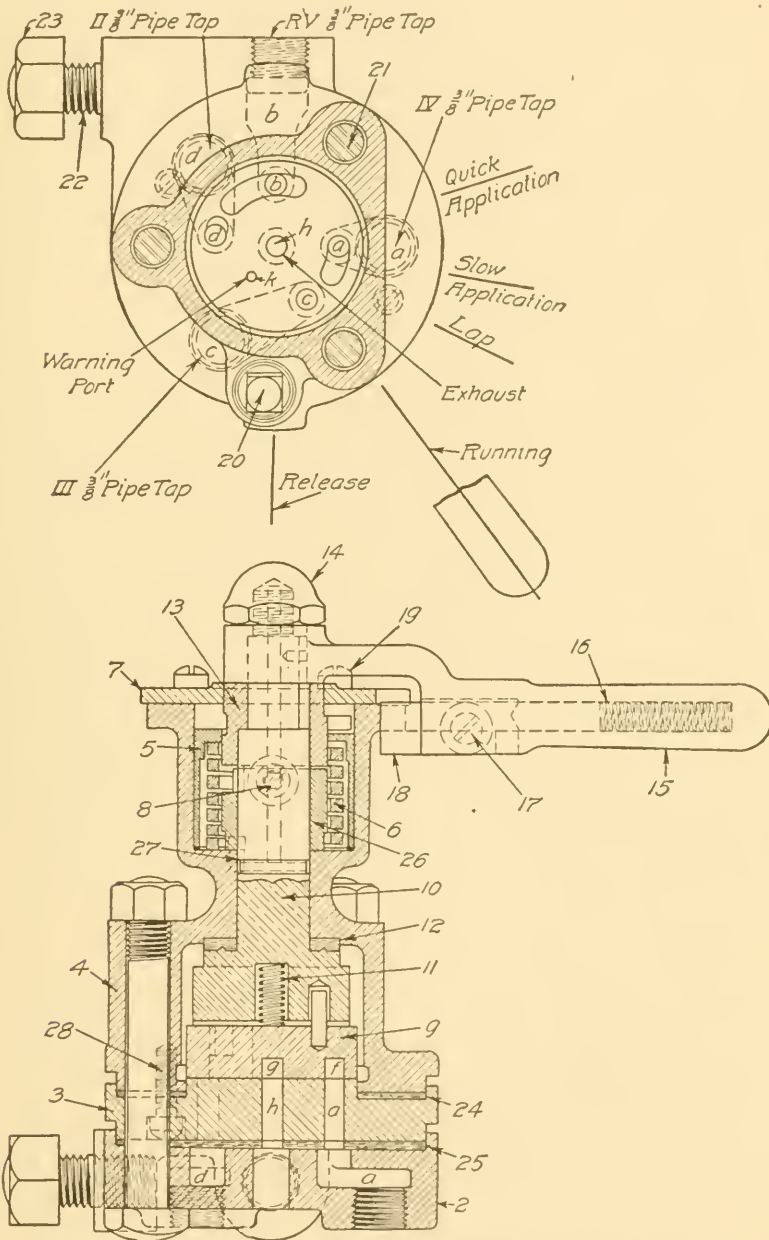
Plan and Sectional Elevation of Westinghouse "S-6" Independent Brake Valve
